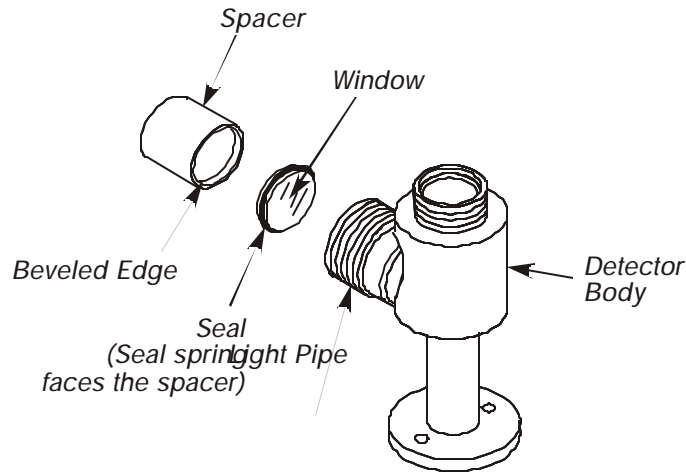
42 Inserting a seal and window assembly into the FPD body
